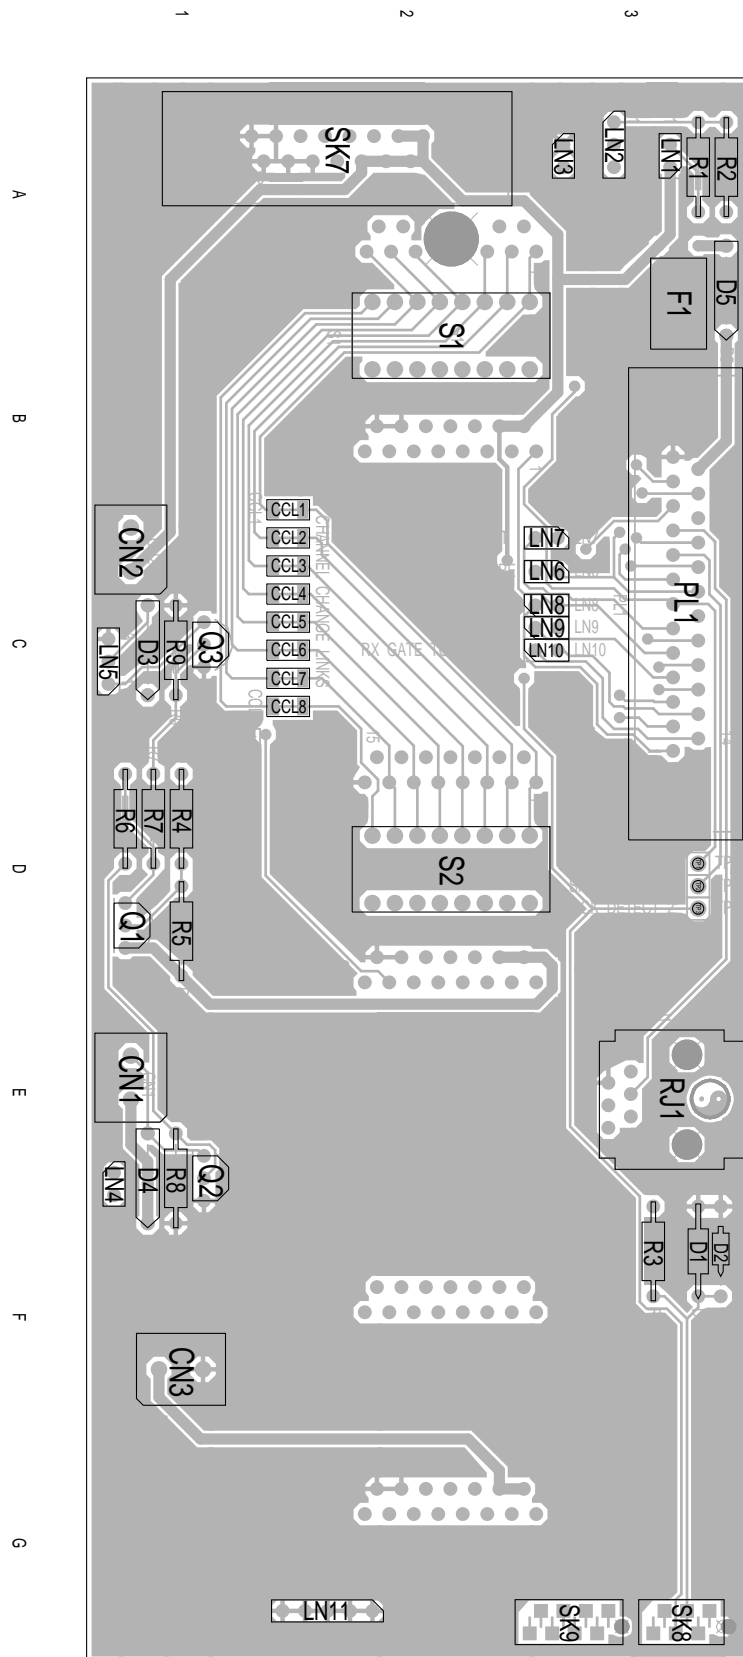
T800-55-0000 PCB Layout - Top Side (Outer)
